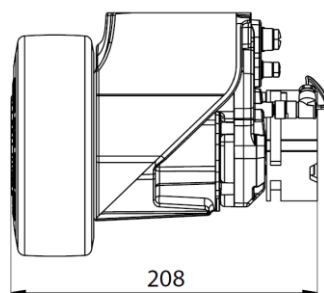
Overall dimensions – ‘SWD® 150 2-stages’ with external brake
